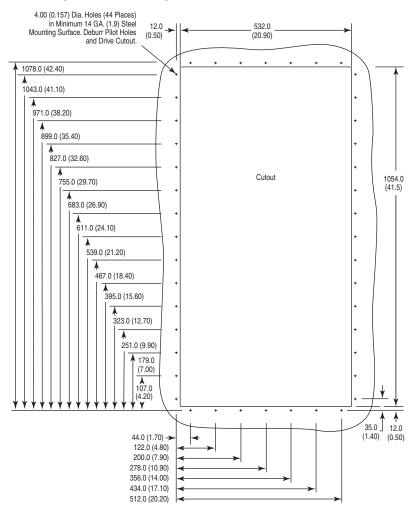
Frame 6 NEMA/UL Type 12 Flange Mount (400-690V drives only)
